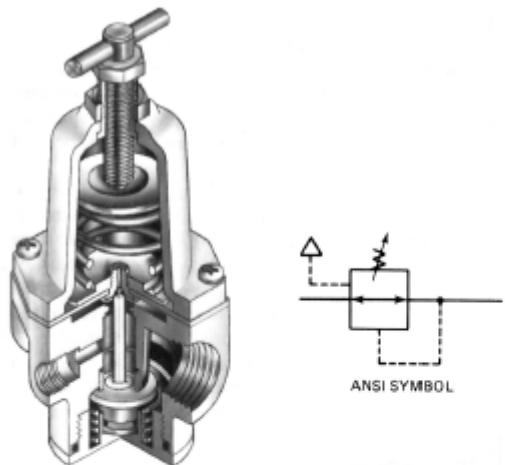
Cutaway of pneumatic pressure regulator. (Courtesy of Aro Corp., Bryan, Ohio.)
